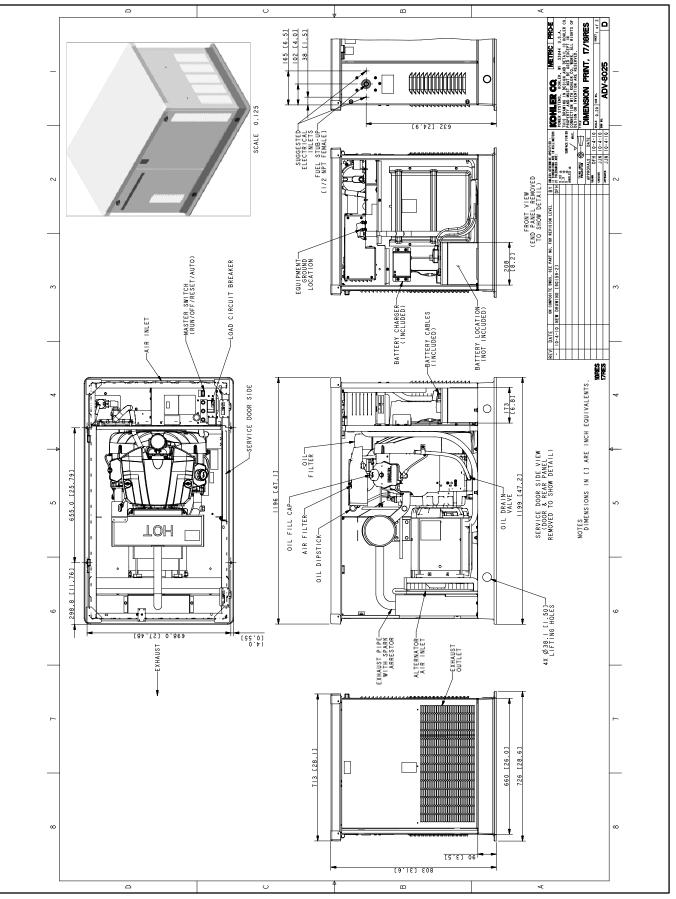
Generator Set Mounting Details and Dimensions, 18RES, ADV-8025, Sheet 1
